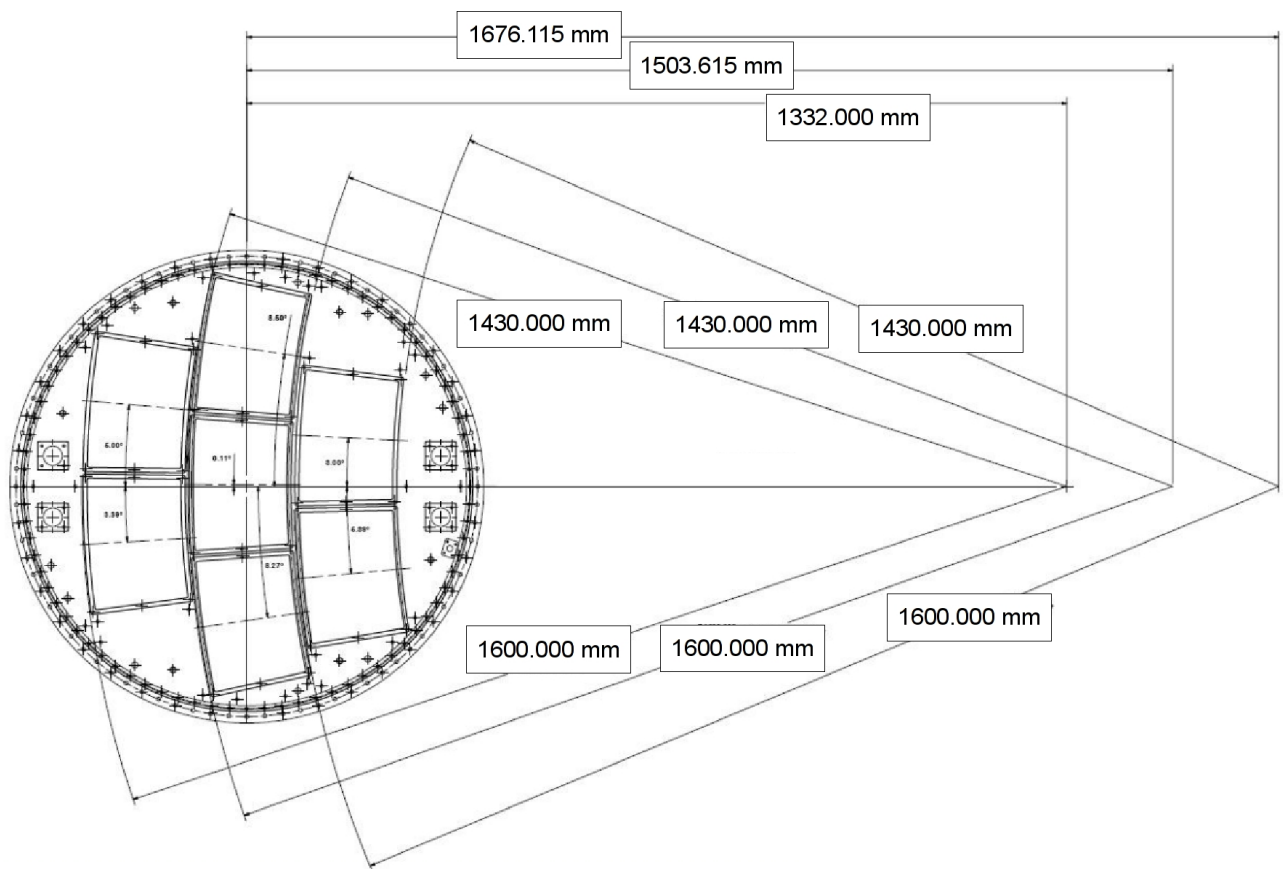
The prototype TPC module plane is a part of the final TPC module plane.
